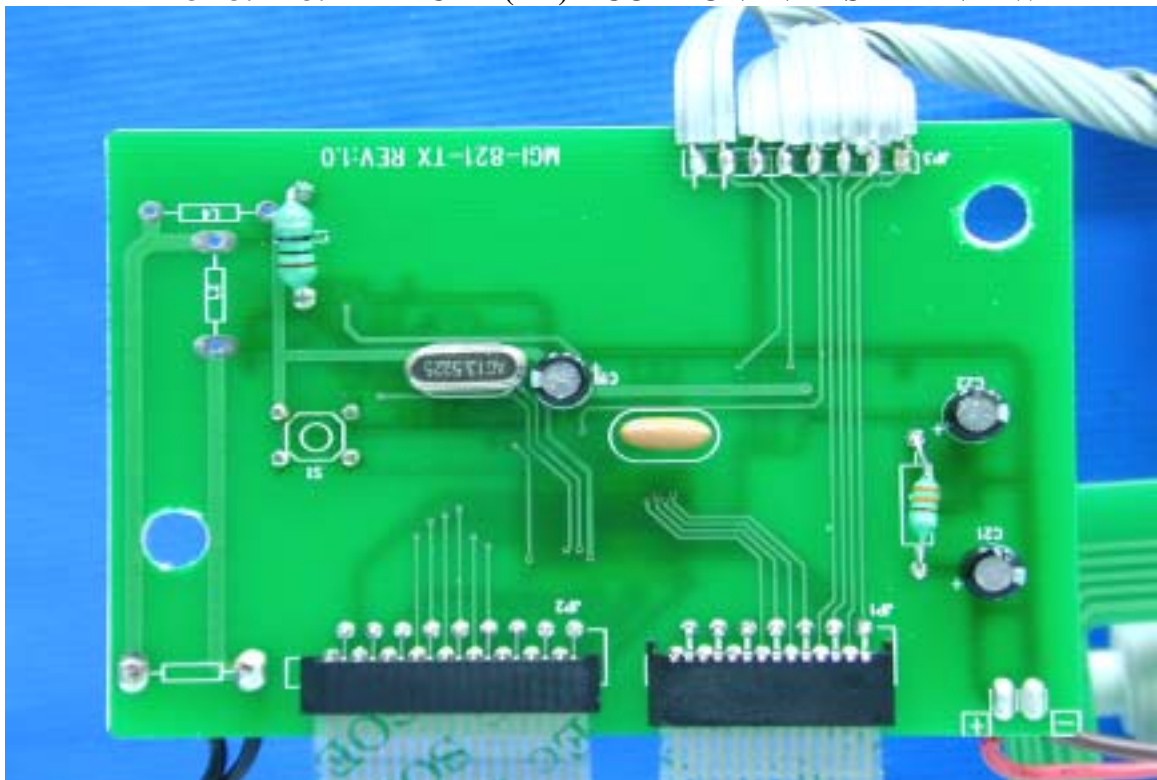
EUT (TX) SOLDERING SIDE VIEW
